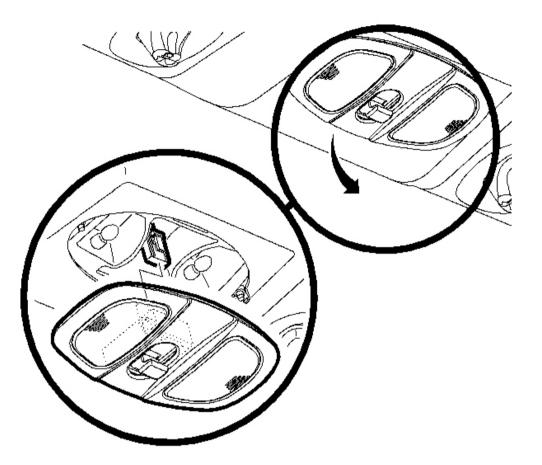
View Of Reading Lamp Cover Courtesy of GENERAL MOTORS CORP.
